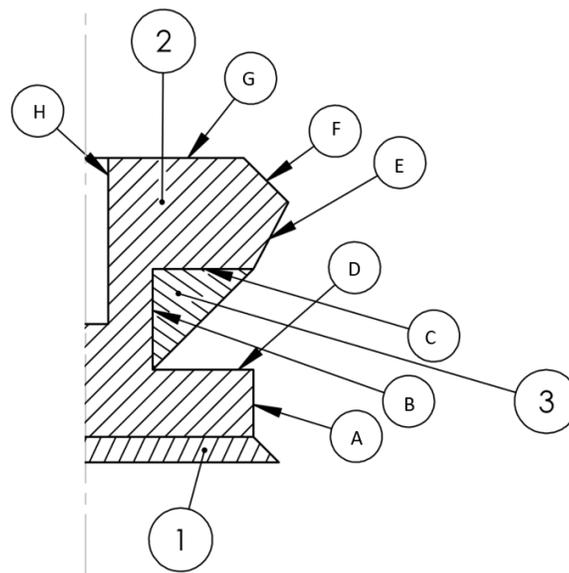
Half-section of the example part with surfaces that need to be finished.
